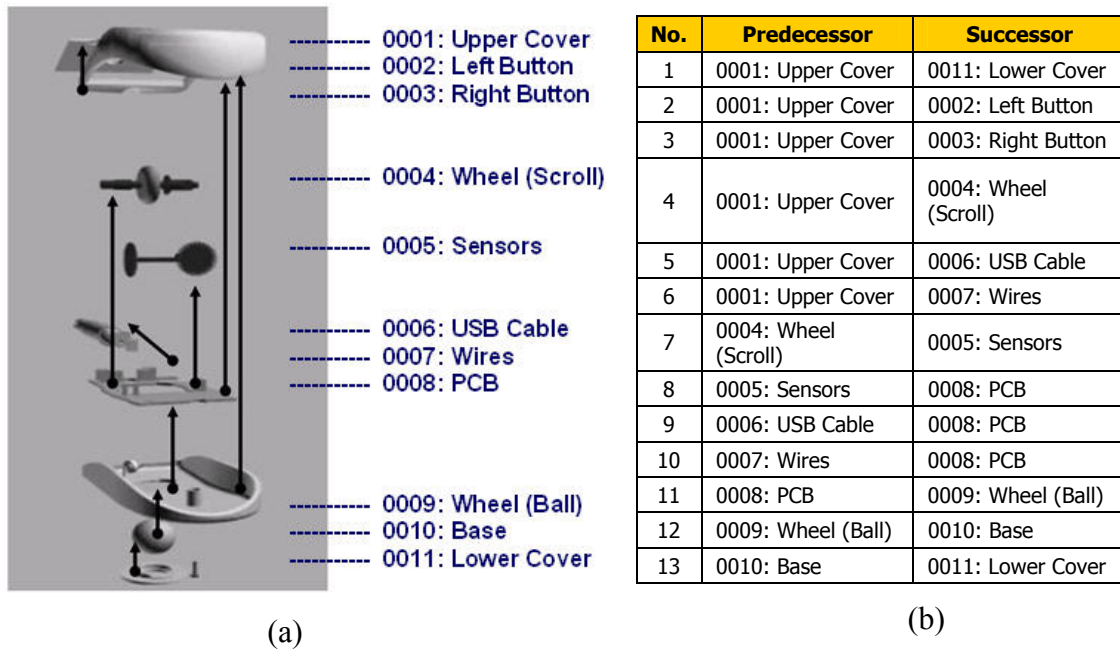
The wheel mouse: (a) exploded-view; (b) disassembly sequences.
